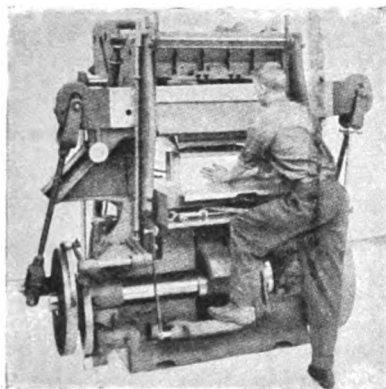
SEYBOLD 3-KNIFE TRIMMER
